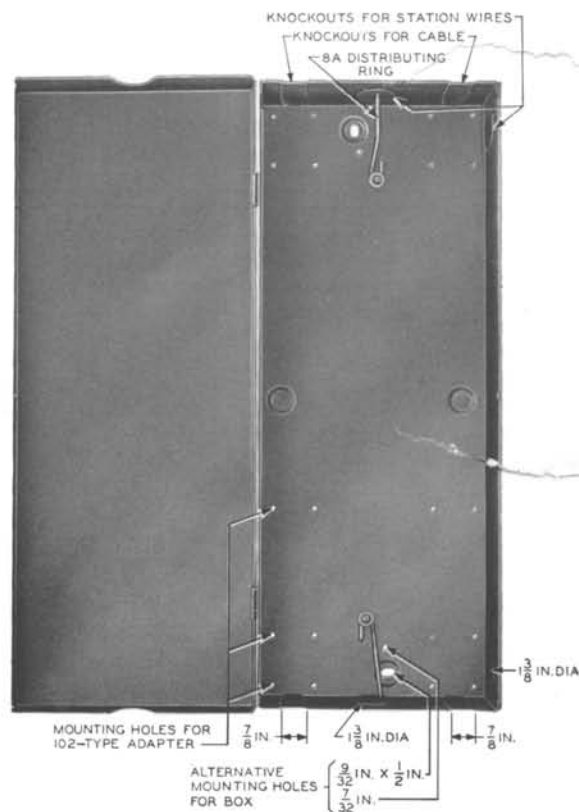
GC-TYPE CABLE TERMINAL BOX
